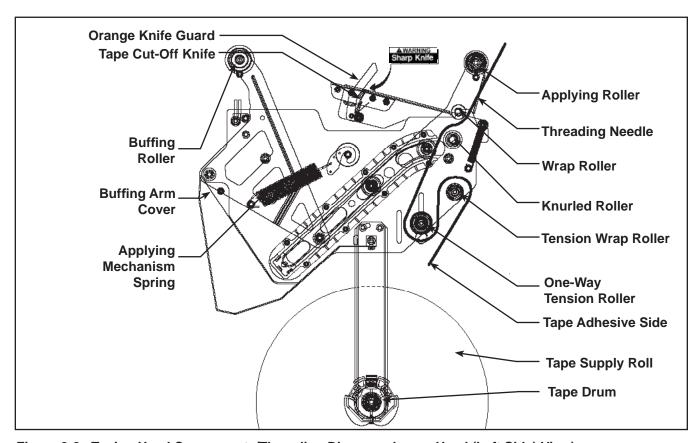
Taping Head Components/Threading Diagram - Lower Head (Left Side) View)
